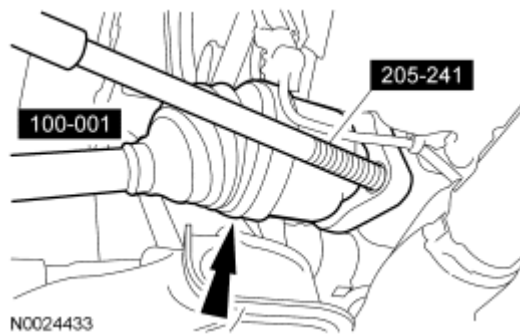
Removing RH Outer Halfshaft Using Special Tools
